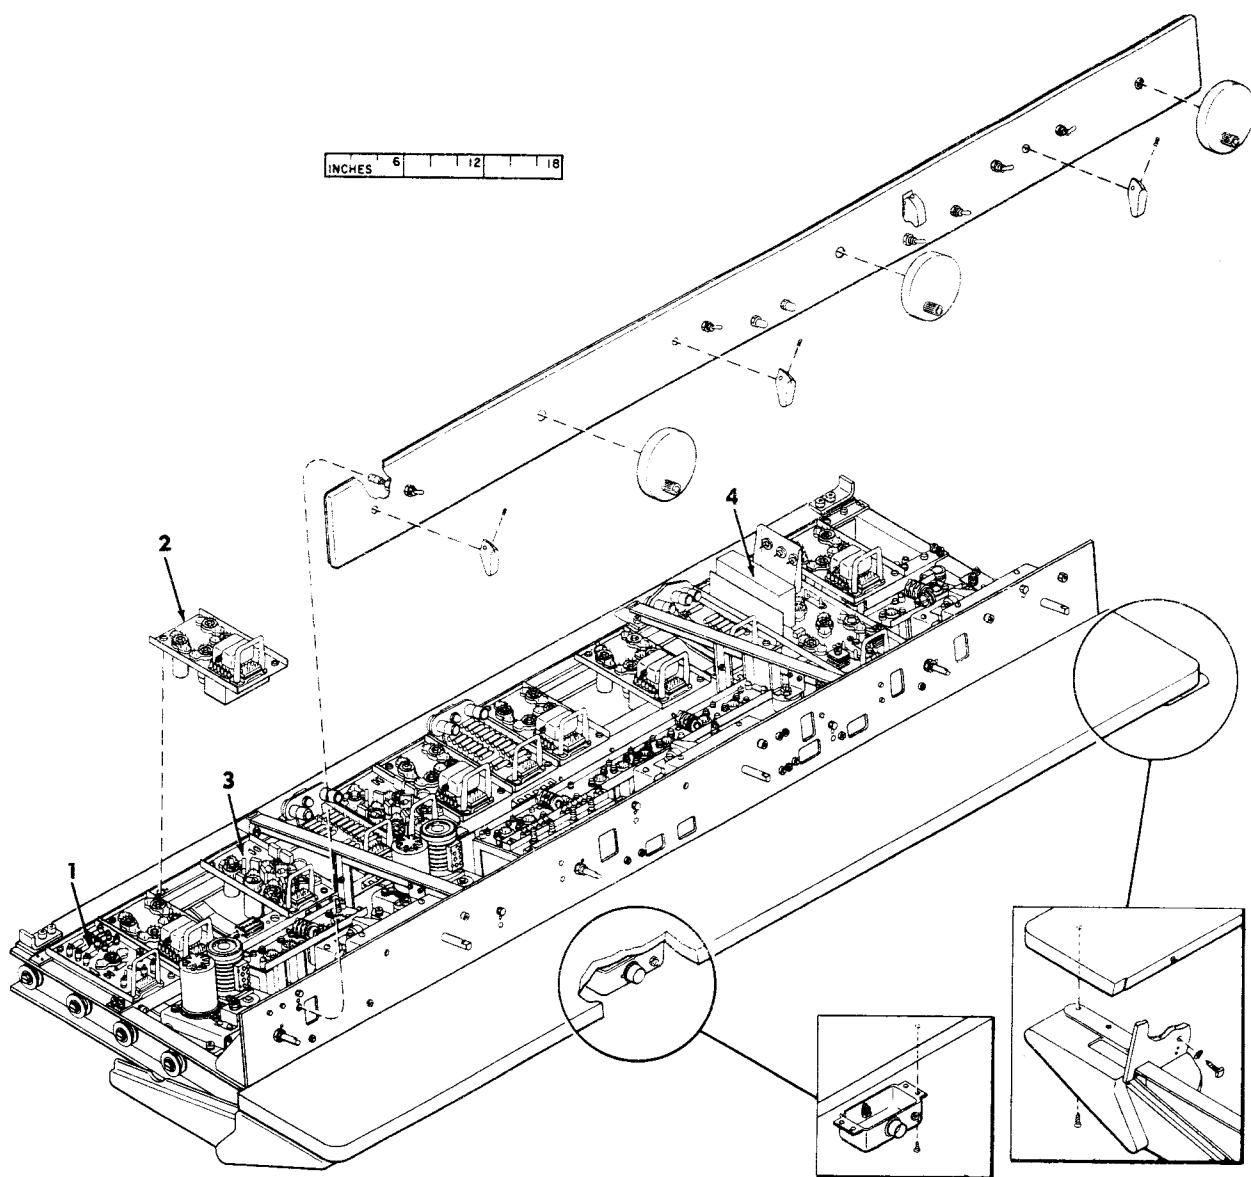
Capacitor-resistor assembly (9986419)—partial exploded view
